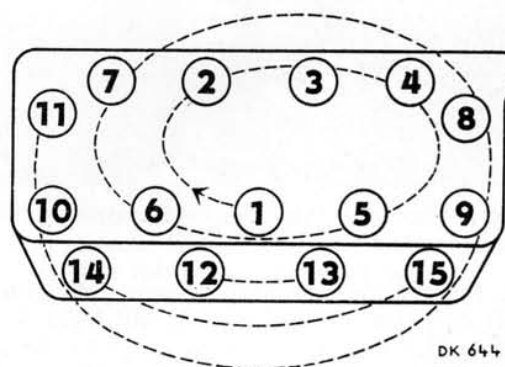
/1 - Tightening Diagram of Cylinder Head Bolts and Nuts
